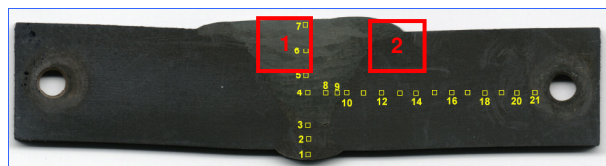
Corrosion coupon after the exposure test in HTHL-1; 1-weld material; 2- Heat affected zone (HAZ)
